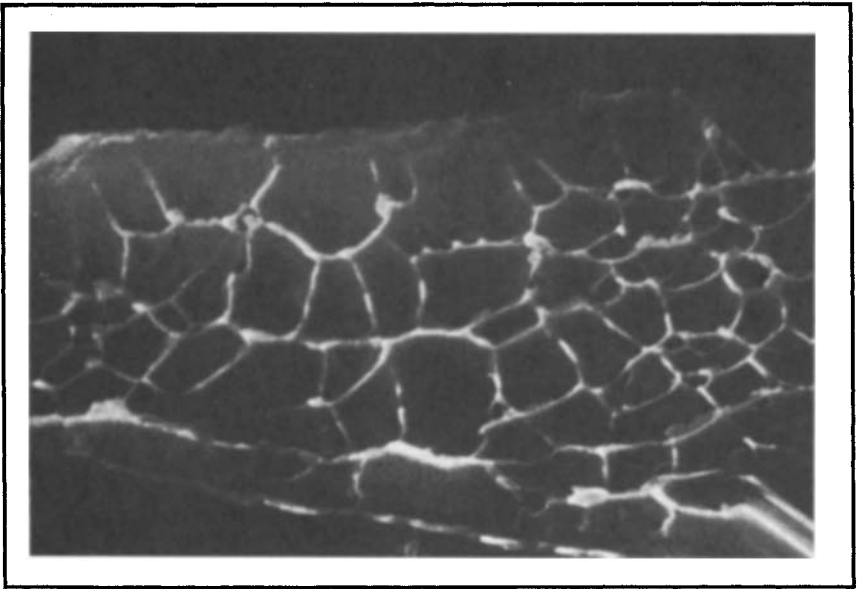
SEM imaging of tensile fracture in A357 casting (18,400 \times). (Courtesy of Boeing Commercial Airplane Co.)
